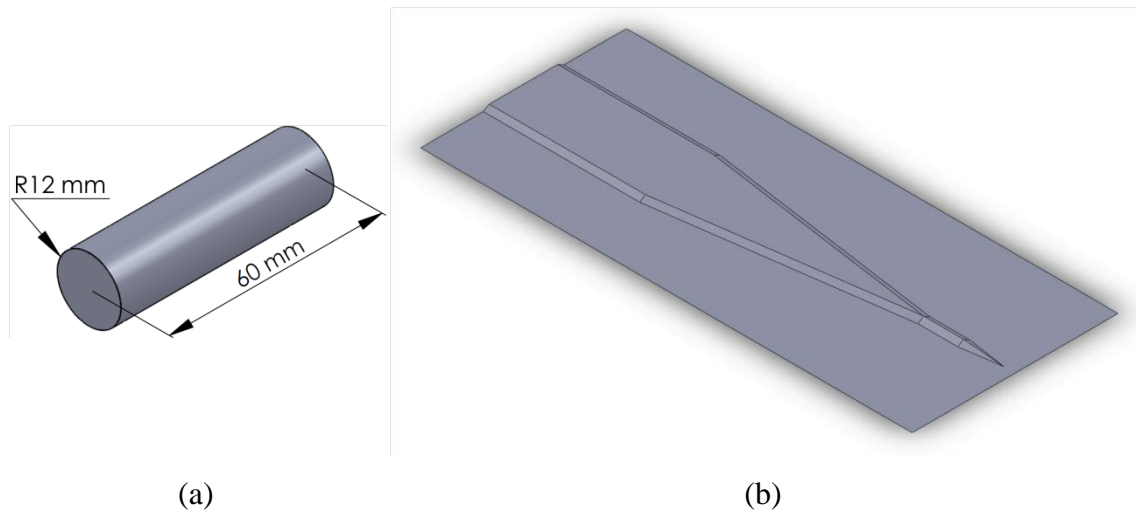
(a) The workpiece and (b) Tool-2: basic flat-wedge type tool geometry used for parametric studies.
